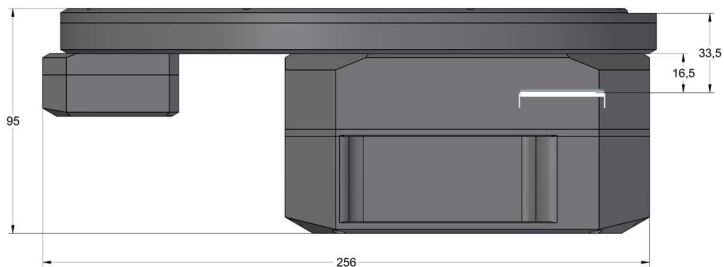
C4 camera head with Enhanced cooling and External filter wheel side view dimensions
